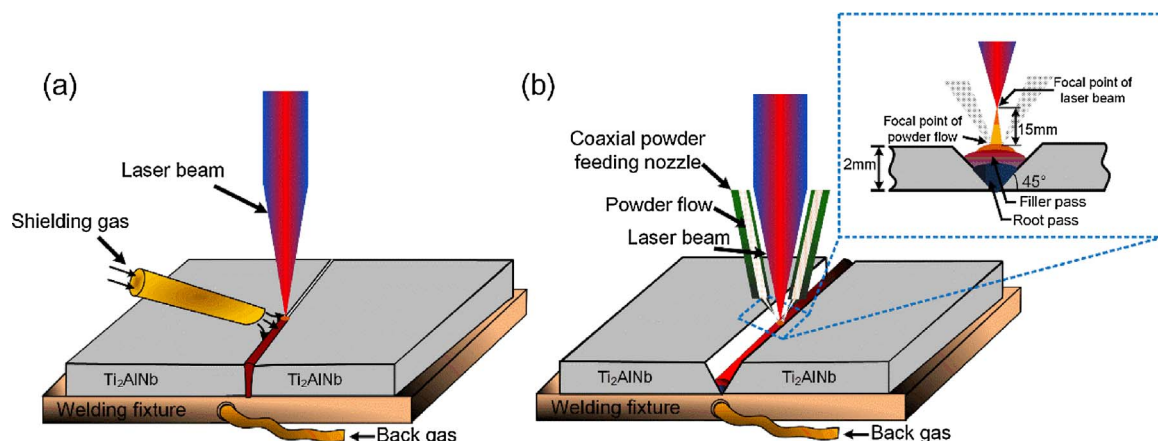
Schematic diagrams of (a) laser welding and (b) laser-additive welding.
